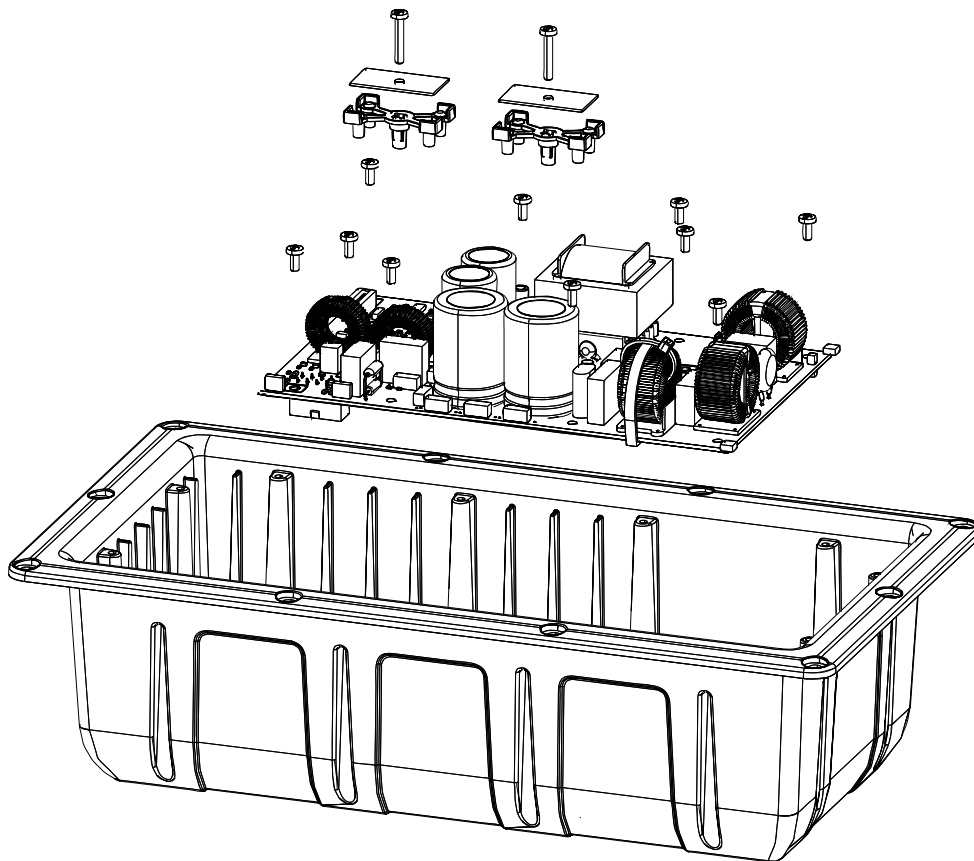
PSU/amplifier PCB removal from the bucket chassis.
